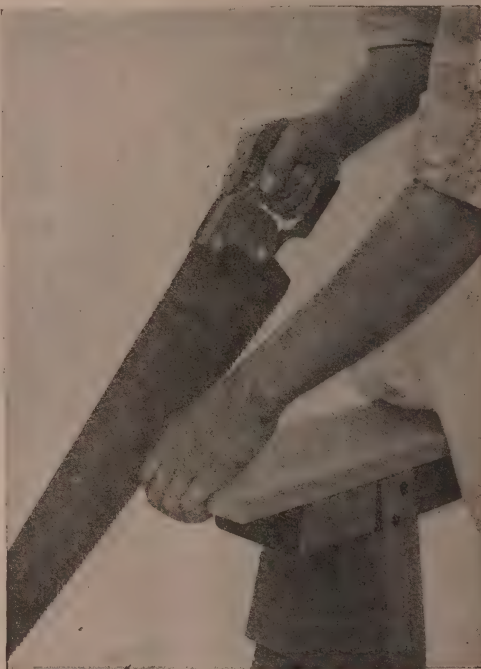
Guiding Saw with Knuckle for Cross-cutting or Ripping
